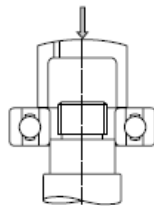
Press Fitting Inner Ring (extracted from www.omesin.com)
